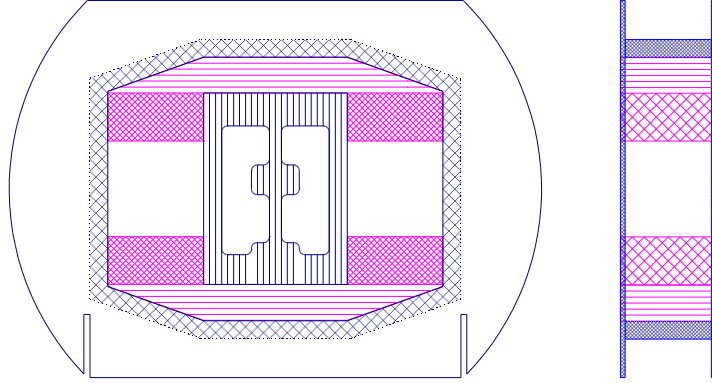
Magnet assembly. Magnets and yokes (magenta), frame and magnet support (dark blue).
